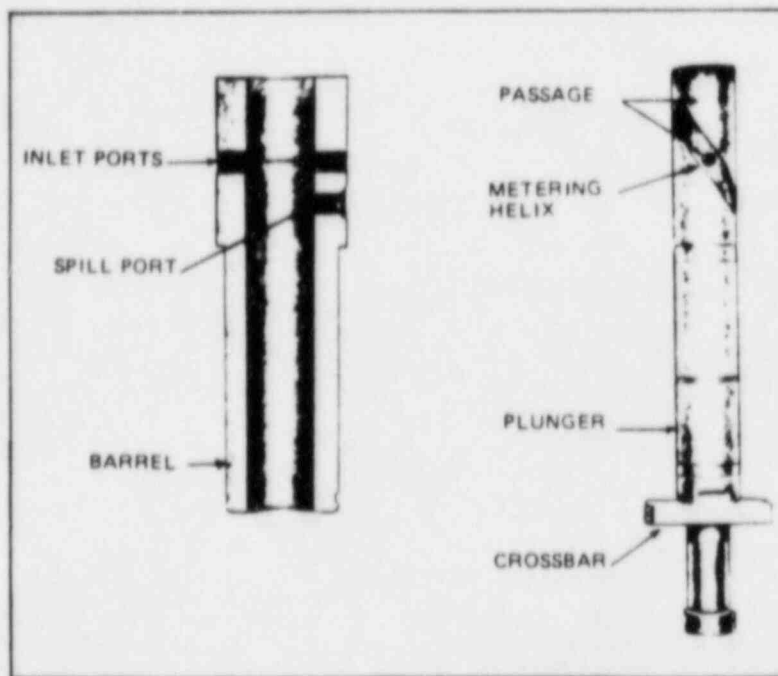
F-3. Pump Plunger and Barrel Arrangement
